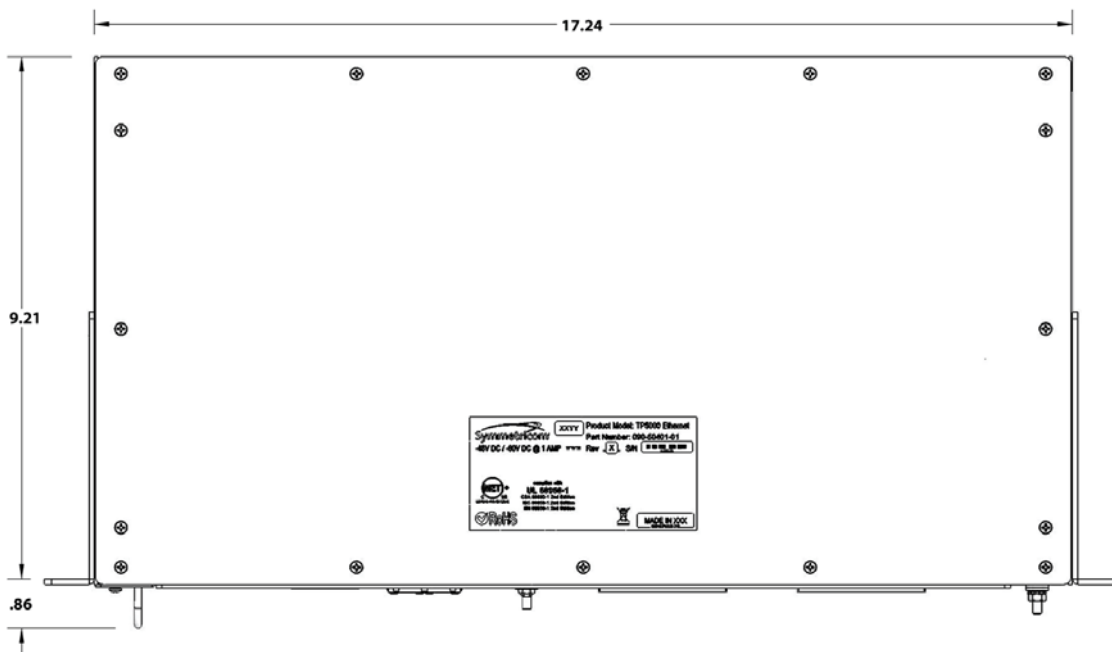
Rack Mounting the TP E10 Expansion Shelf
